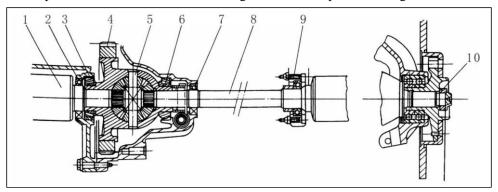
Assembly Relation of Drive Shaft on the vehicle
